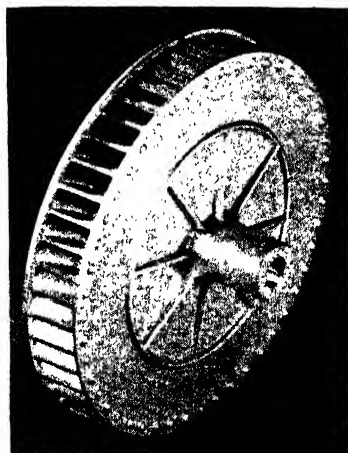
Although this blower rotor for an oil burner required an expensive die for casting, both die cost and piece cost were lower for the one-piece die casting. The stamped assembly, which was superseded, involved assembly operations and required a sand-cast hub.
